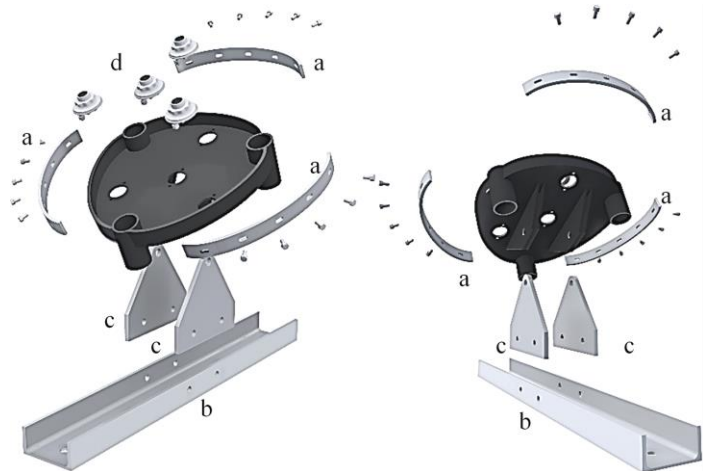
Exploded view of imposition (clamping plates^a, U-profile^b, hinge plates^c and pressure valves^d)
